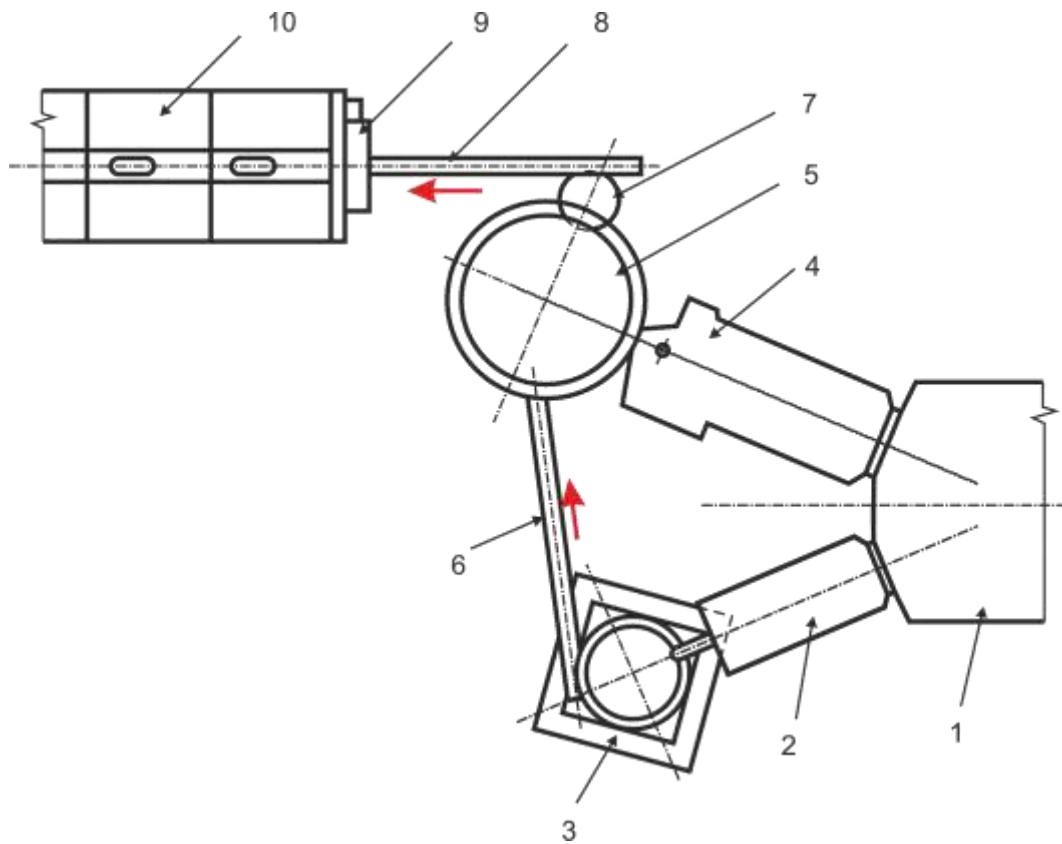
Diagram of cup production line: 1 - melting unit, 2 - automatic press feeder, 3 - press, 4 - blowing machine feeder, 5 - automatic blowing machine, 6 - pressed stem conveyor, 7 - cup and stem take-out, 8 - conveyor for products to the annealing furnace, 9 - loader of products to the annealing furnace, 10 - annealing furnace
